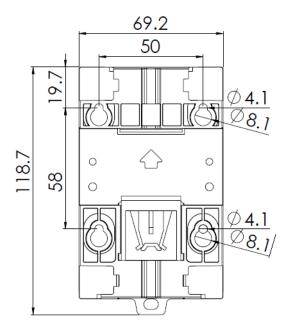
WISE-4000 Series Mount Kit Dimensions
